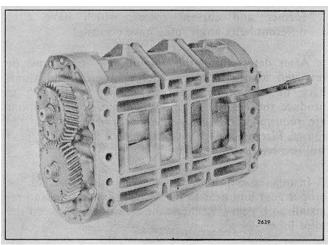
Measuring End Clearance Between Blower Rotors and End Plate
